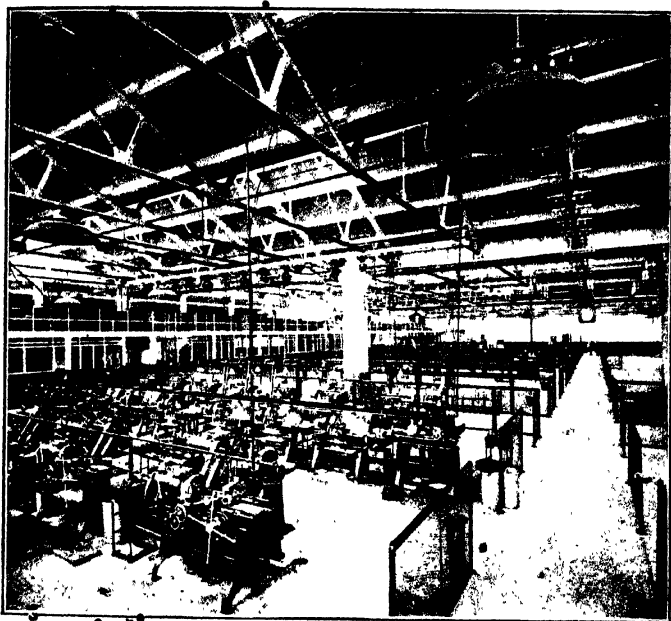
Interior of factory. (A. Alban Scott, Architect.)
